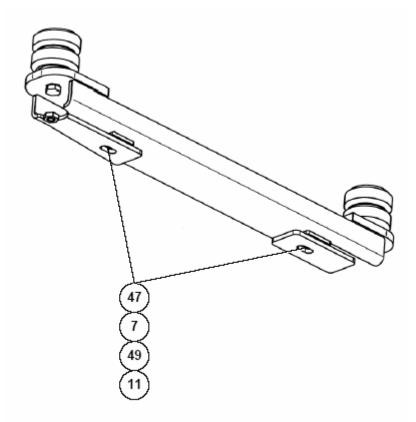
Fasteners Map - Cab Support Reinforcement.
